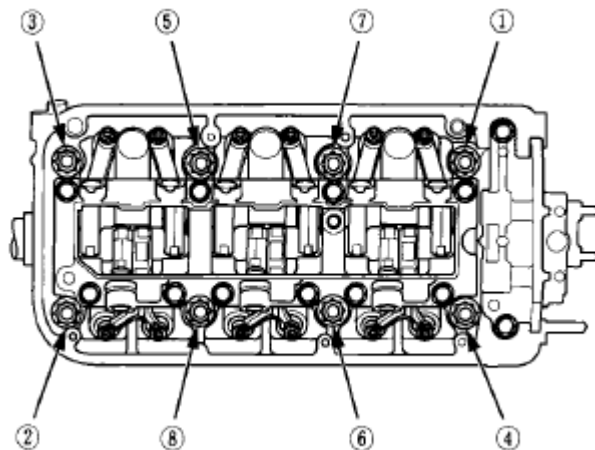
Identifying Cylinder Head Bolts (Rear)
